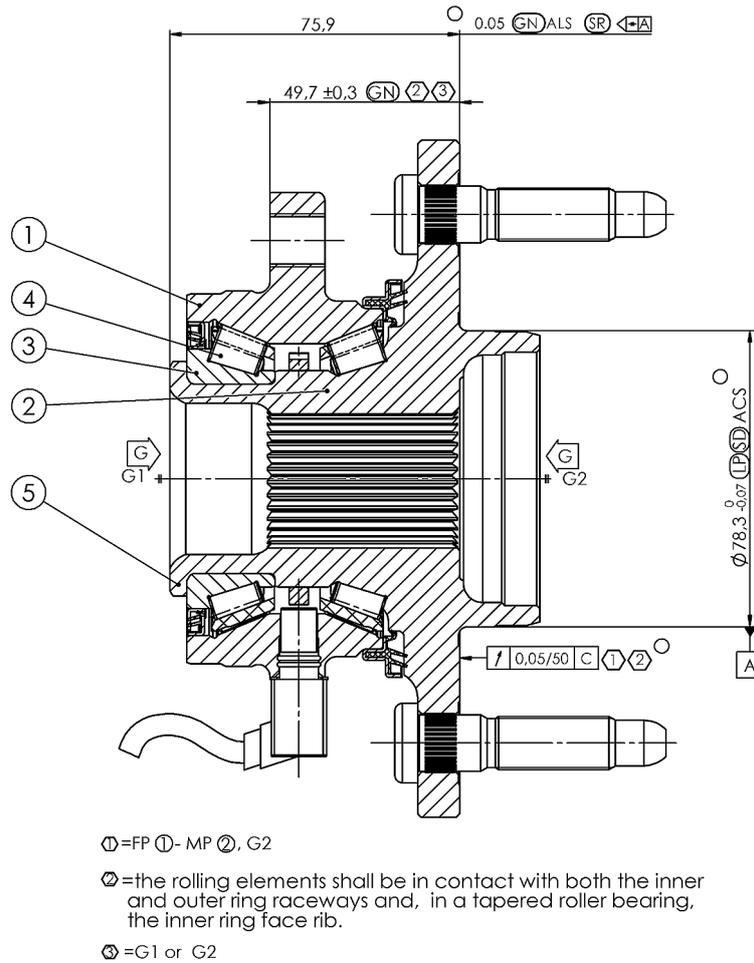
Third generation bearing hub using a double-row tapered roller bearing design: 1 – outer flange ring, 2 – inner flange ring, 3 – inner ring, 4 – rolling element, tapered roller, 5 – flared flange of inner flange ring
